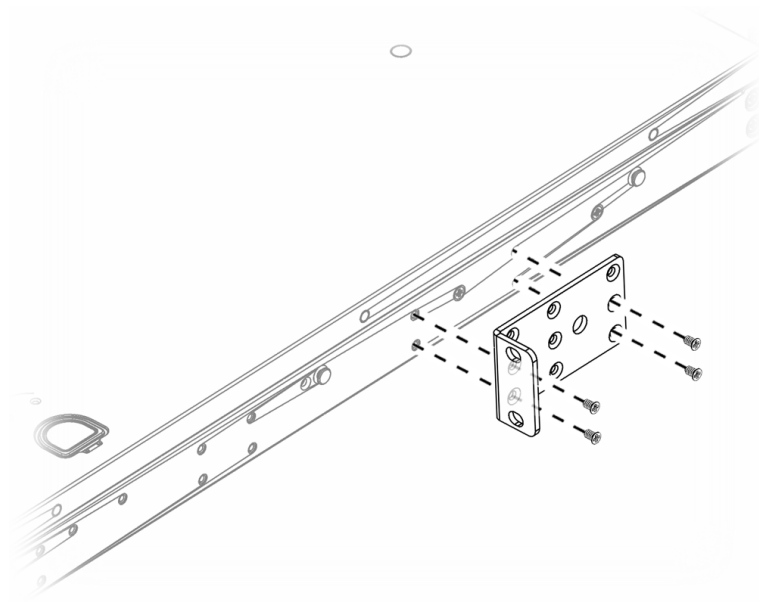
Mid-Mount: Attaching Short Mounting Brackets
